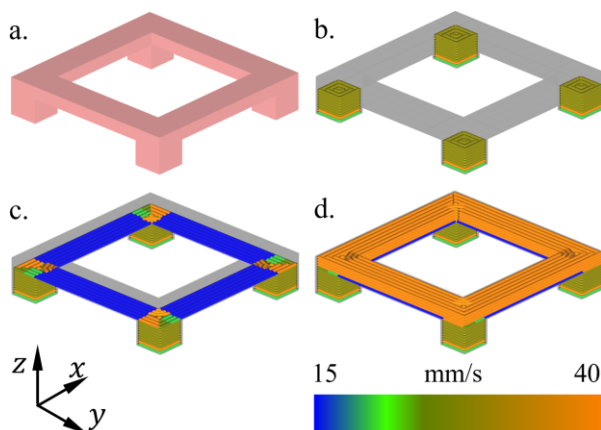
The working principle of bridging for FFF: a. CAD model for suspended printing; b. printed pillars; c. printing of the first suspended layer at a slower speed of 15 mm/s; d. completed part.
